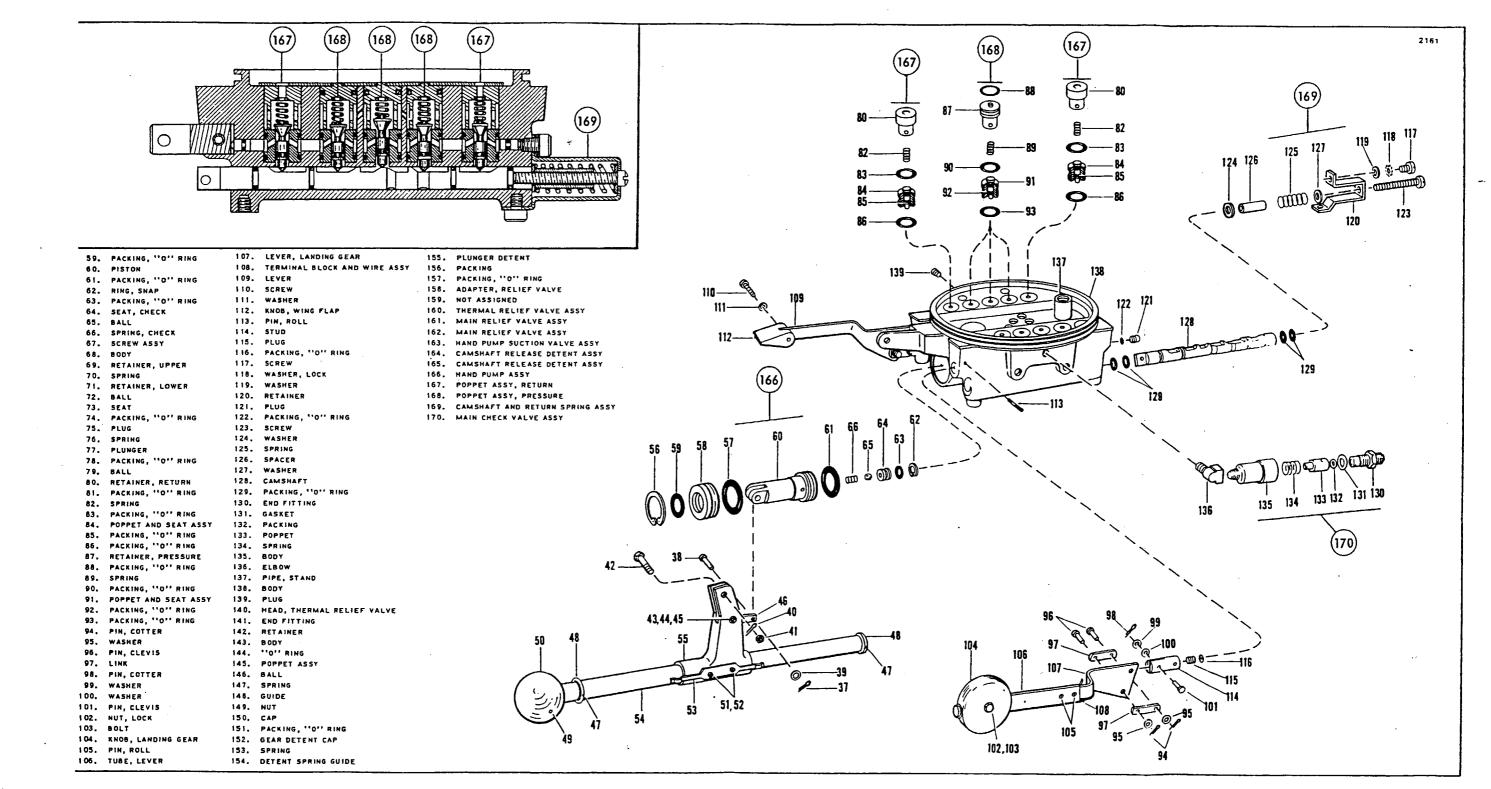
Hydraulic Powerpak, Exploded View (cont.)
